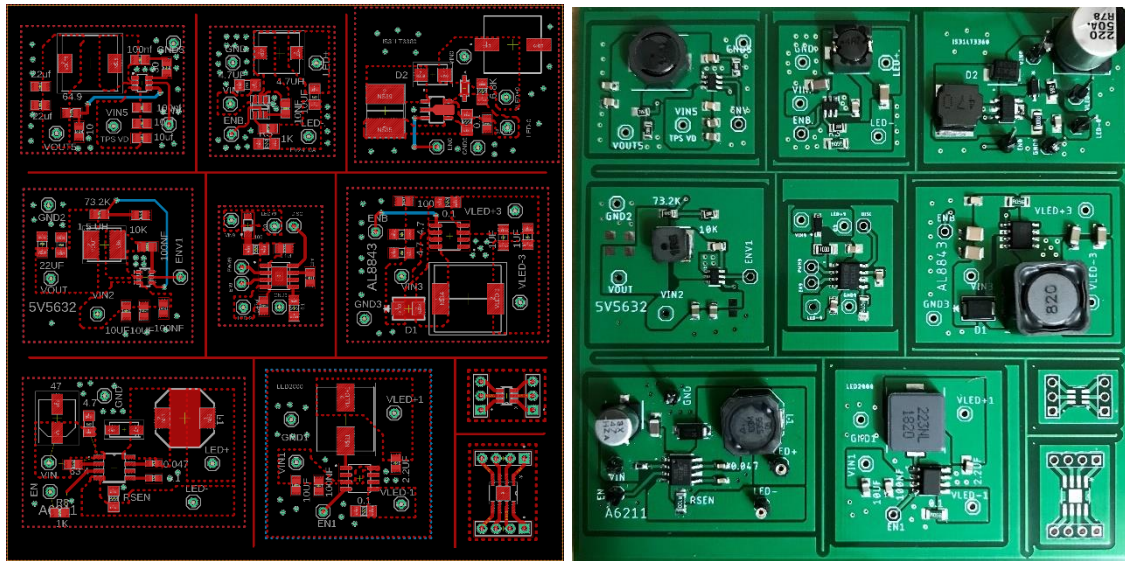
PCB Rev. 1 layout (100 mm x 100 mm)
